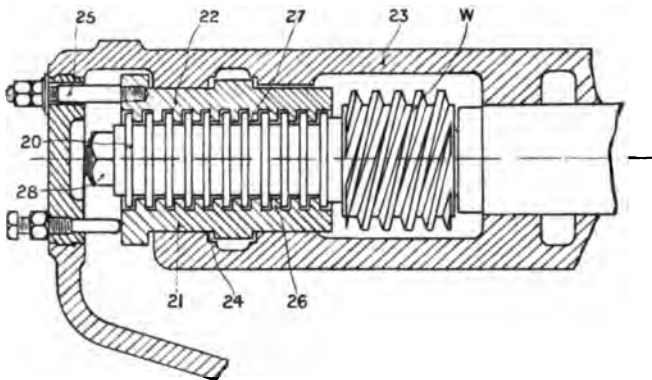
Thrust or Adjusting Block of Brown-Boveri-Parsons Steam Turbine. The Worm for actuating the Governor, etc., is also shown.
